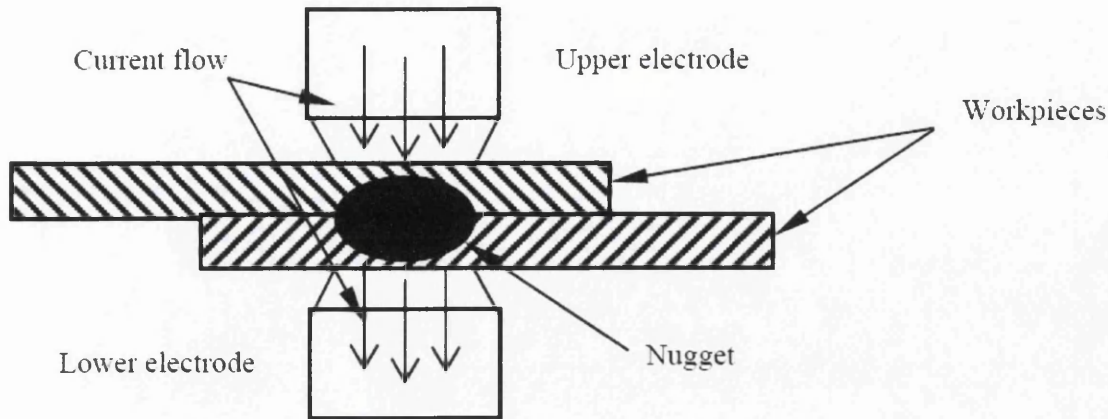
A Schematic representation of the resistance spot welding technique.
